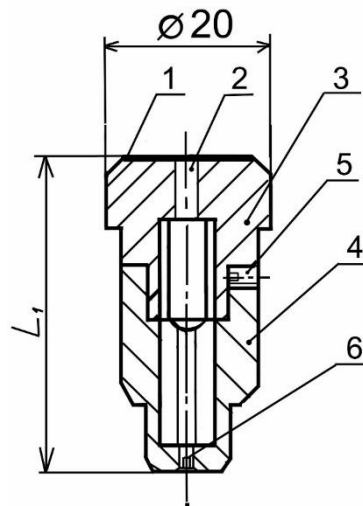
Sample for testing: 1 - coverage; 2 - pin; 3 - matrix; 4 - cover; 5, 6 - locking screws
